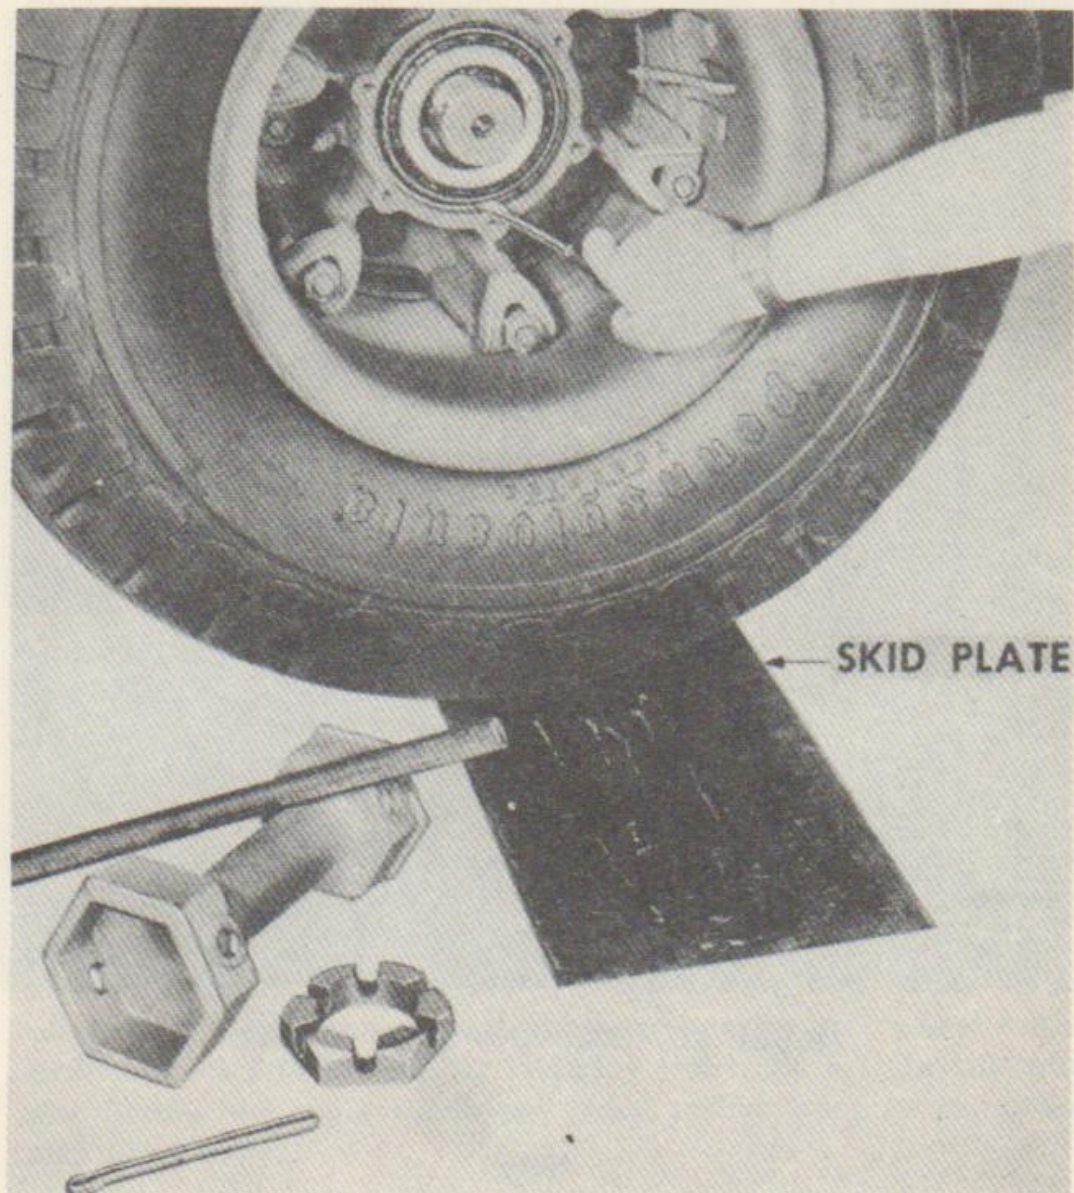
REMOVING WHEEL AND TIRE ASSEMBLY
